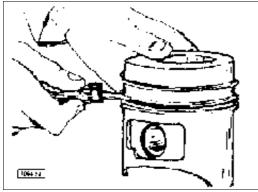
Checking clearance between piston rings and piston ring grooves in piston.
